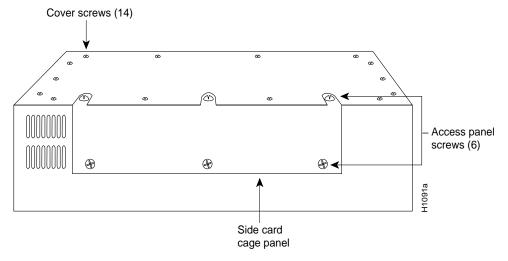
Screw Locations on the MGS Chassis Exterior—Side View
